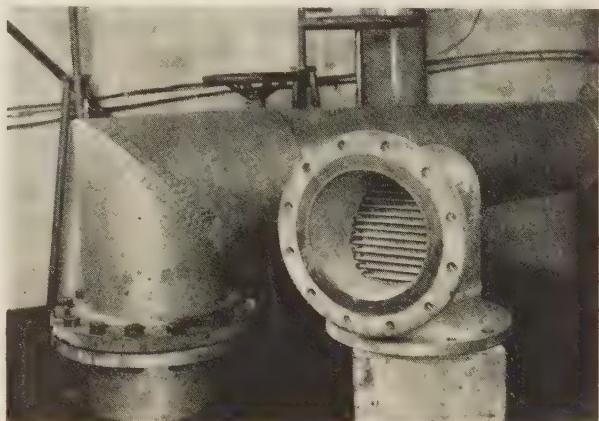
THE 12-IN. WELDED VANE ELBOW
